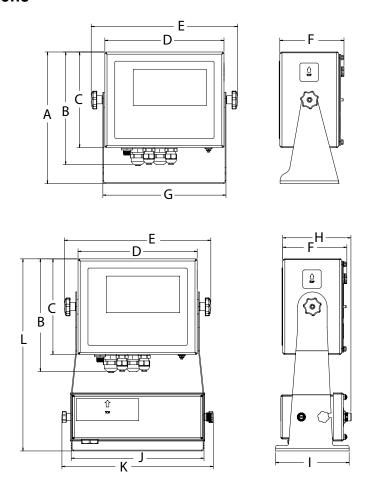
882IS Product Dimensions (universal and optional battery versions shown)
